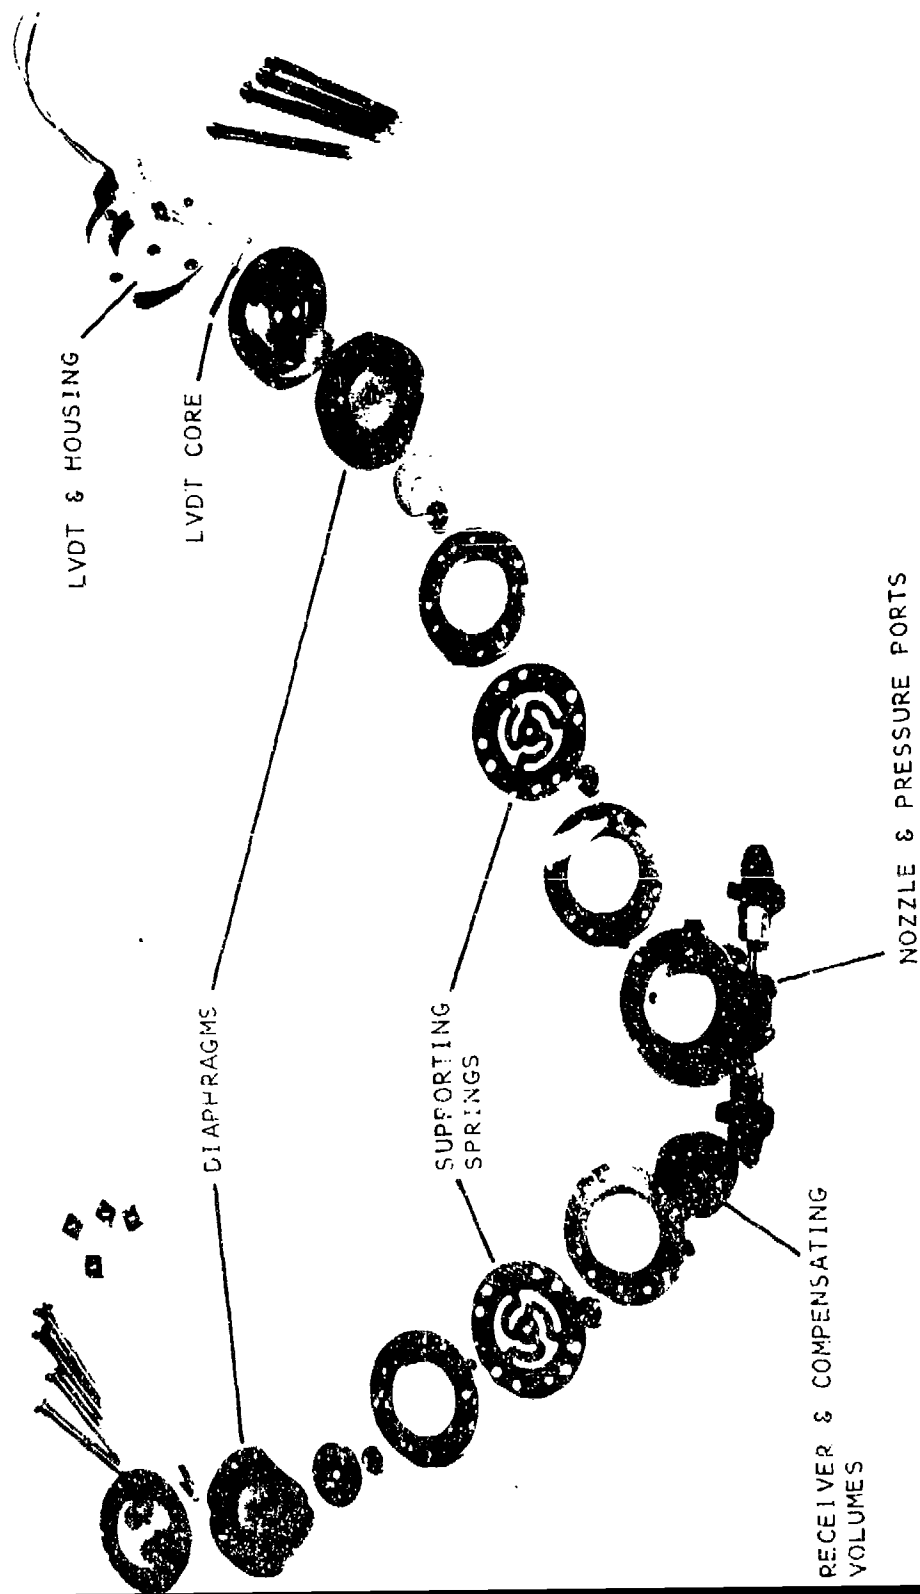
Exploded View of  $\Delta P/P$  Sensor.
